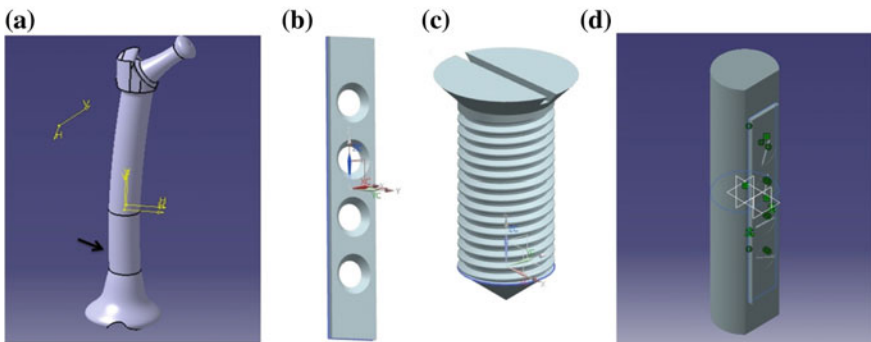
Geometric modeling of bone and implants: a femur bone, b fixing plate, c screw, and d fractured bone implant assembly
